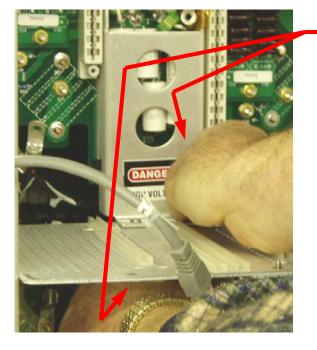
Remove Wiring From Studs / Remove Mounting Screws
